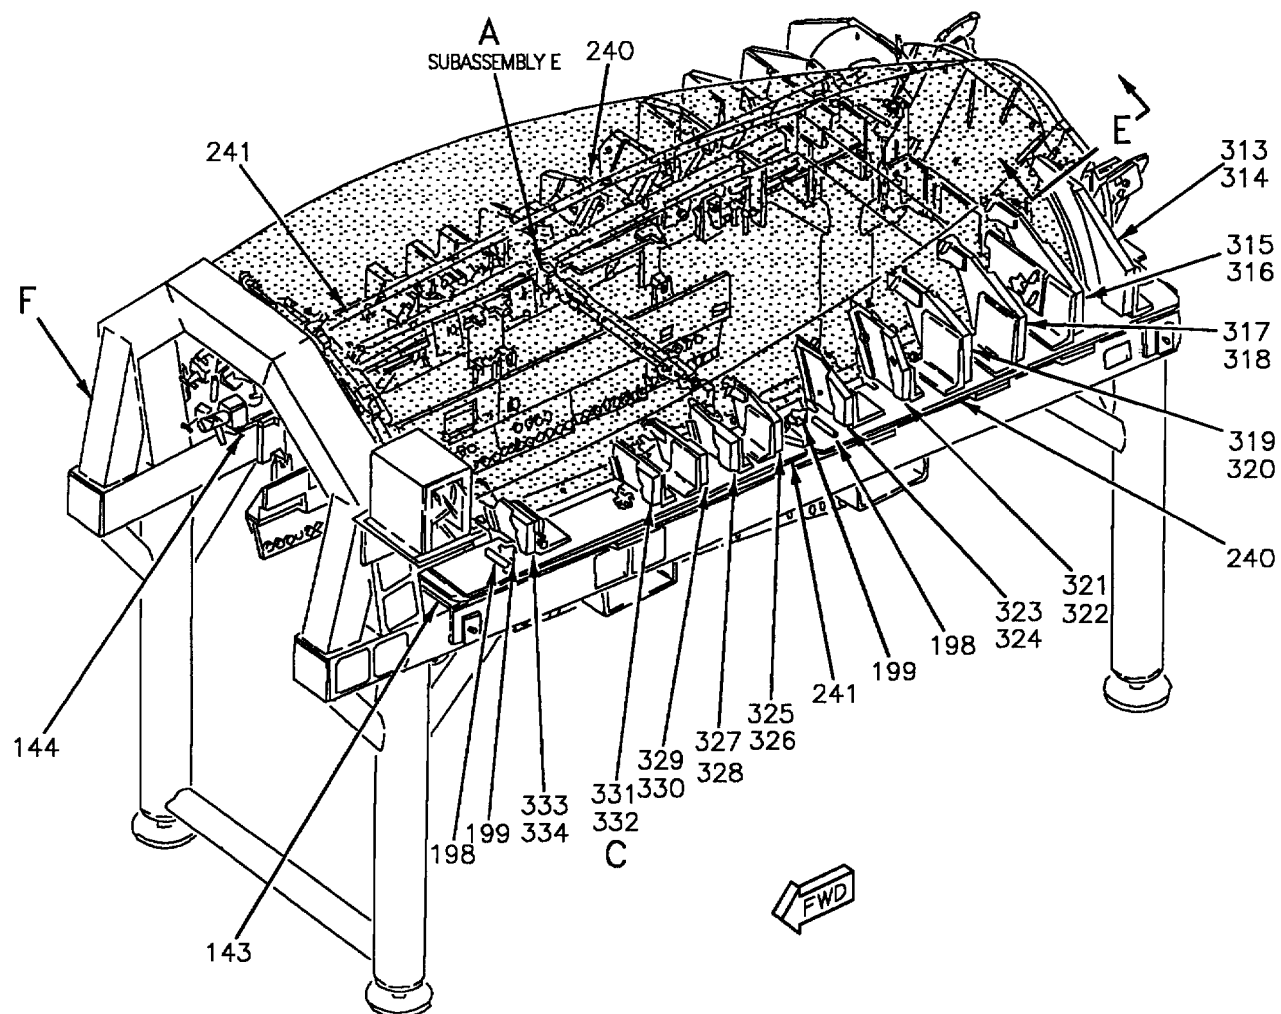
Inspection or Replacement - Side Fairing (Sheet 1)
